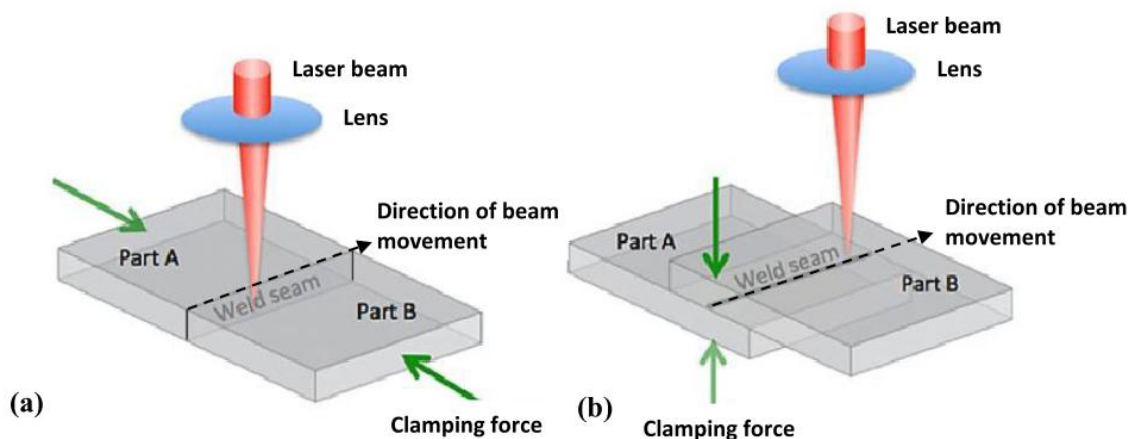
Typical joint configuration for (a) laser butt welding, and (b) laser transmission welding [22]
